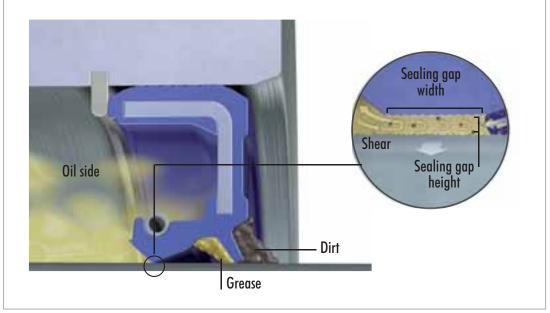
Simmerring<sup>®</sup> seal-shaft contact area
